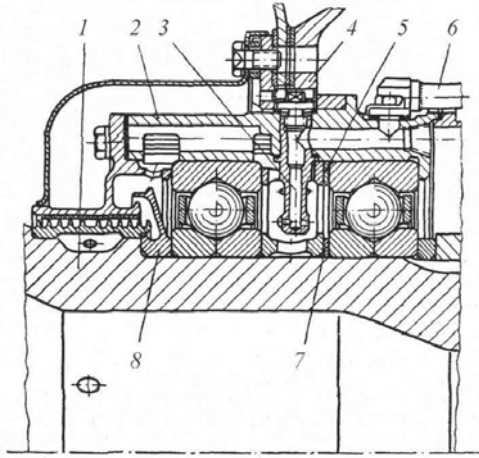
Support with two parallel operating radial-thrust bearings [15]:
